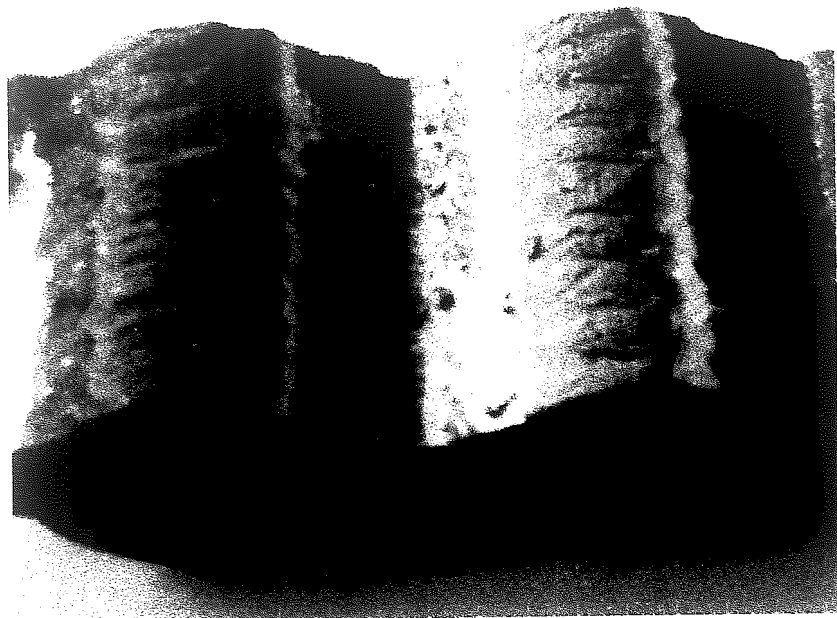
Picture of the boiler tube panel section,  $h$  = periodic crack spacing
